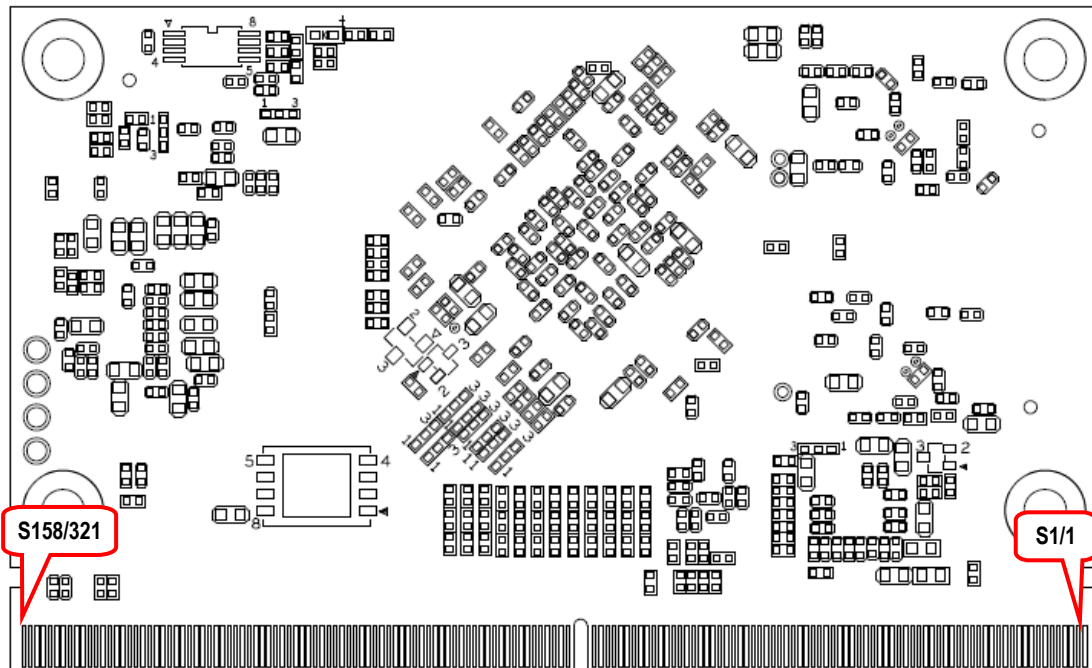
EACOM Board Pin Numbering, Bottom Side
